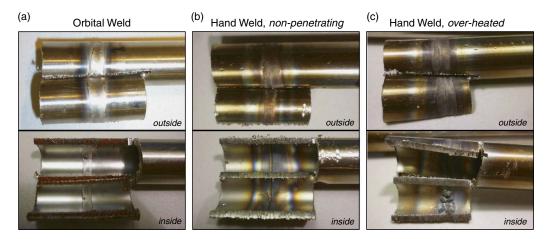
Comparison of stainless steel welds: (a) smooth and complete weld by an orbital welder; (b) a nonpenetrating hand weld; and (c) an overheated hand weld.
